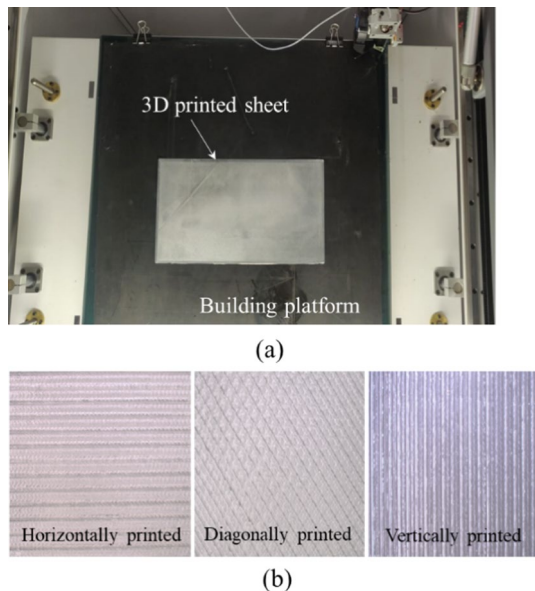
3D printing of planar sheets a printed sheet, and b variation in surface texture
